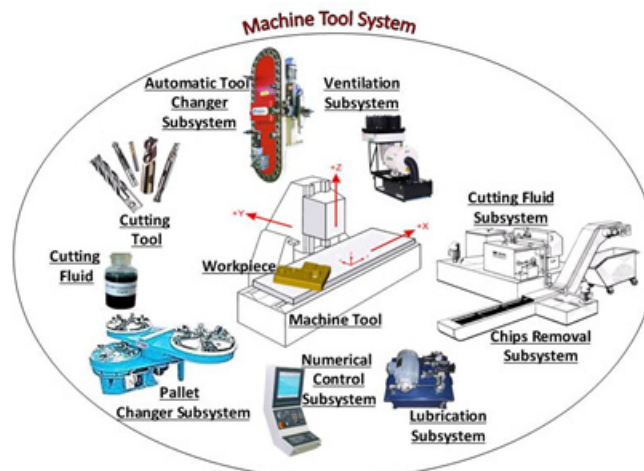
shows a stylised milling machine tool to illustrate the elements. There is a spindle, which holds a rotating cutting tool. The tool is moved in the Y- and Z-directions relative to the workpiece to be machined, which can be moved along X axis. Depending on the architecture of the machine the tool and the workpiece can be moved separately or in combination.
